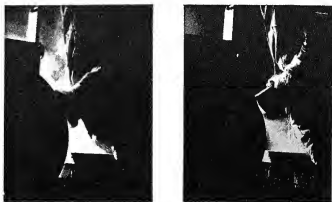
Showing dust clouds when grinding refractory brick on a machine of the type shown in Fig. 5: (a) no exhaust; (b) exhaust of 900 cu. ft./min. in operation.
